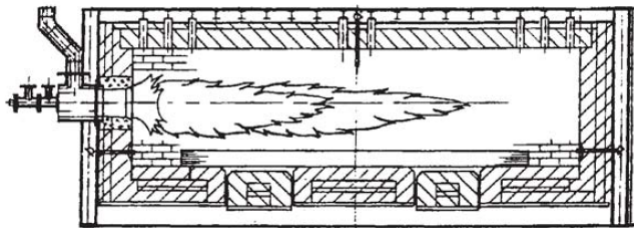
Walking hearth furnace, cross-section detail* [49]
